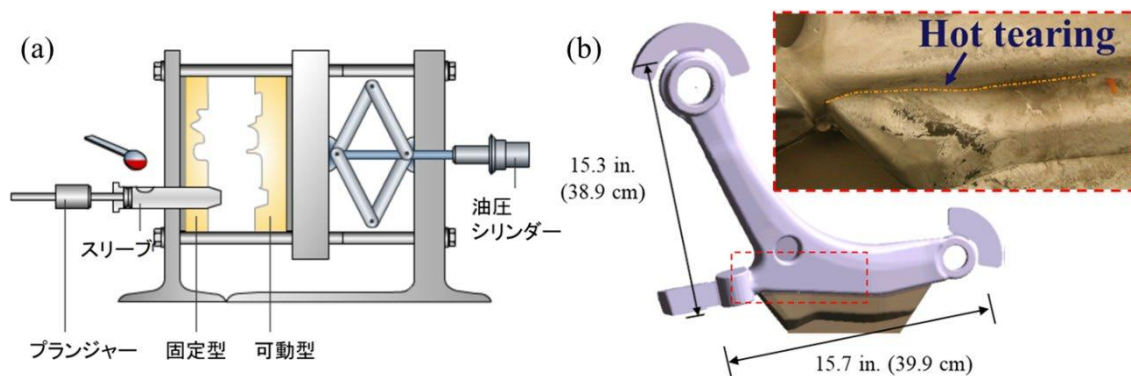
(a) Schematic diagram of high pressure die casting machine, and (b) the occurrence of hot tearing in the control arm castings [8].
